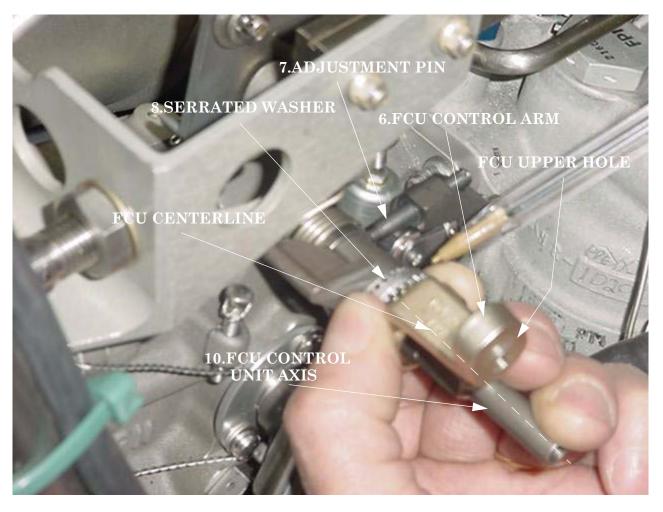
Fuel Control Unit (FCU) - Dead Band Adjustment (Sheet 3 of 6)
